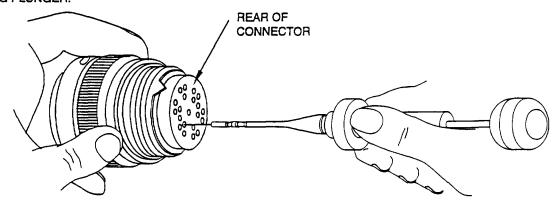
Contact Removal, Unwired Contact, Rear Release (Sheet 2)
